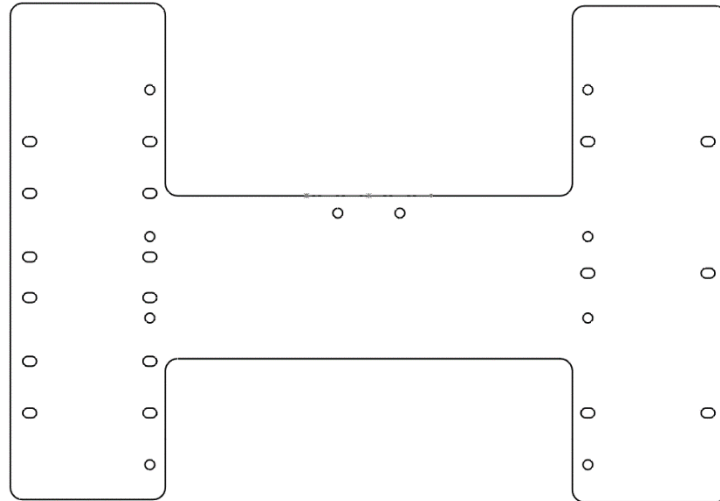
Drawing for the base plate used in the field prototype of the CT-HKT. The Slots were cut on the base plate to account for the manufacturing defects in the U-bolts. While aluminum angles were attached using bolts.
